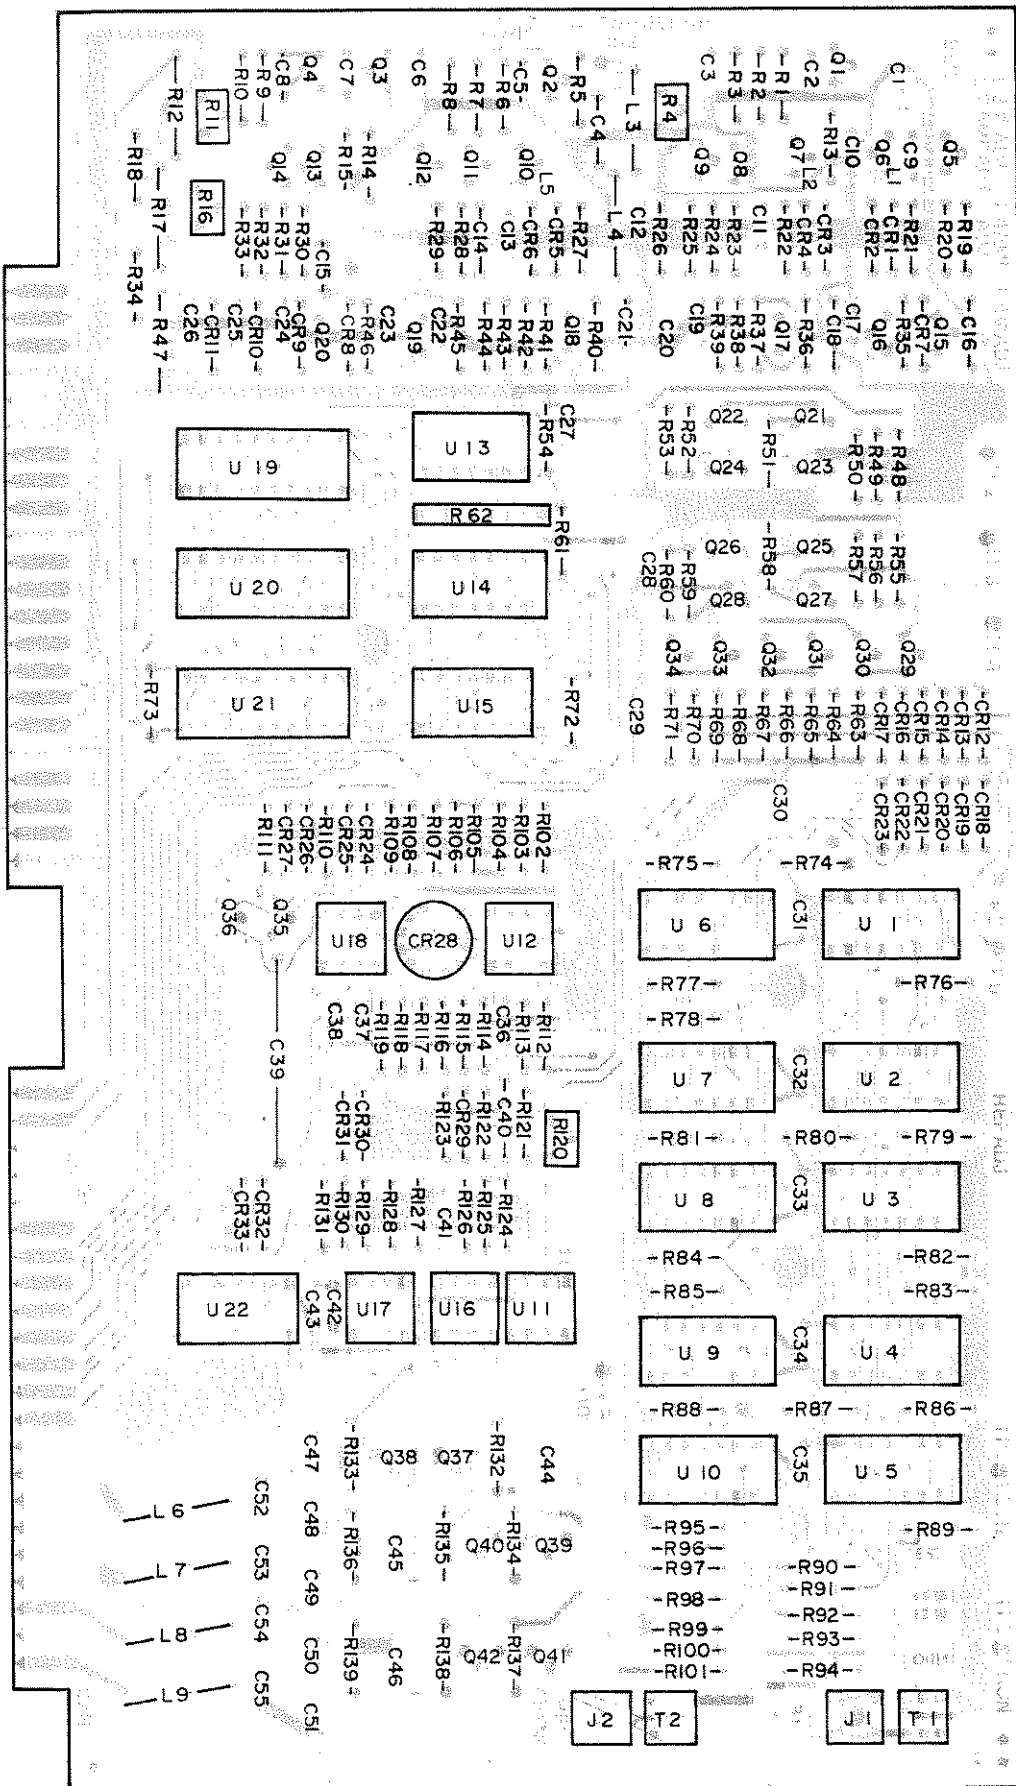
A5 A-D Converter Board Assembly Component Locations.
